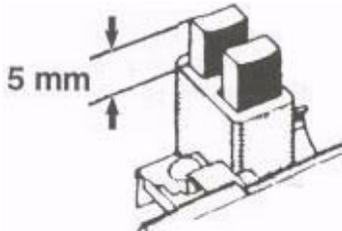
Minimum regulator brush length. If brushes are shorter than 5 mm (0.2 in.), they should be replaced.
